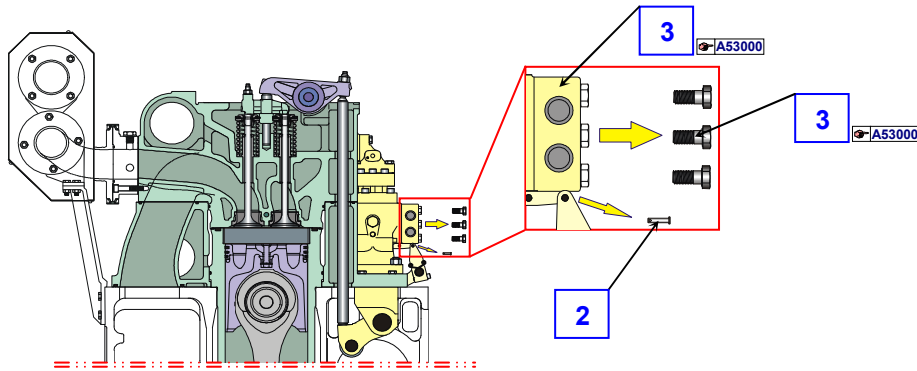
Take out the connection pin, and loosen the three bolts for fuel feed pipe block
